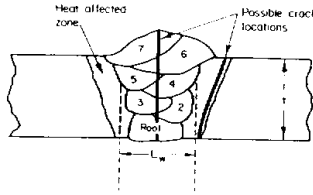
Typical butt-weld sequence for a pipe and possible cracks (this is an actual sequence for a 4-in-dia schedule 80 pipe)
